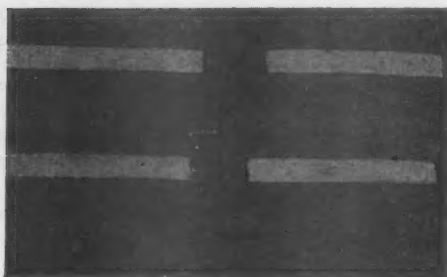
WITH PROPER BALANCE BETWEEN CHILLING METAL AND SECTION, VERY GOOD WELDING OF THE CHILL METAL AND THE CASTING CAN BE ACCOMPLISHED AS ILLUSTRATED ABOVE.
